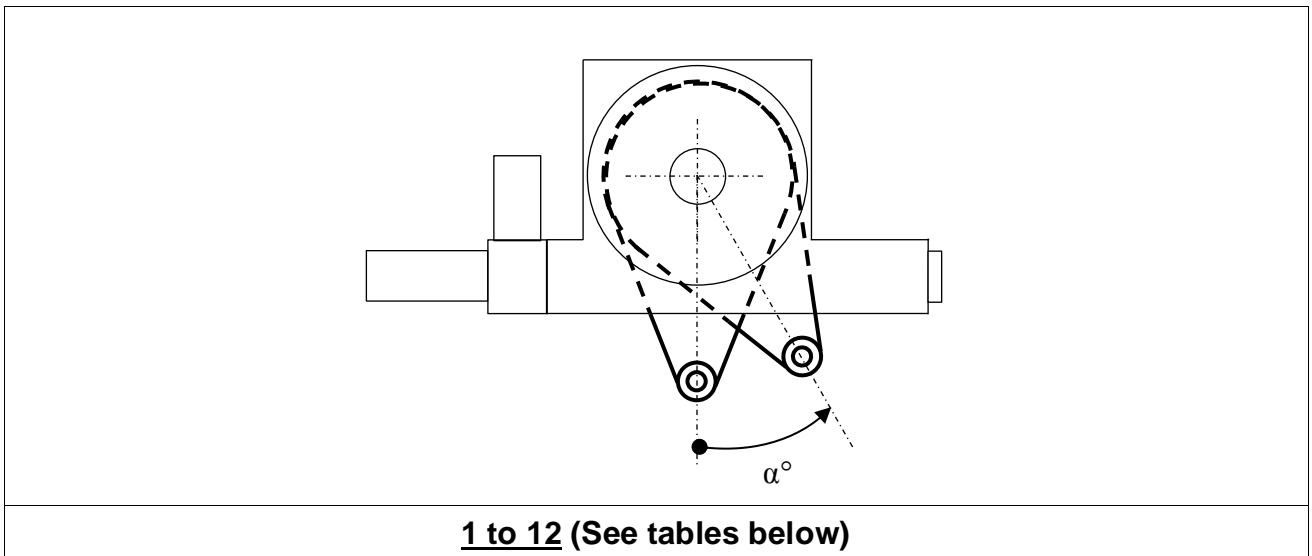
Shaft mounted Hydraulic damping SIGUREN UNIT<sup>®</sup> with reaction arm on side
